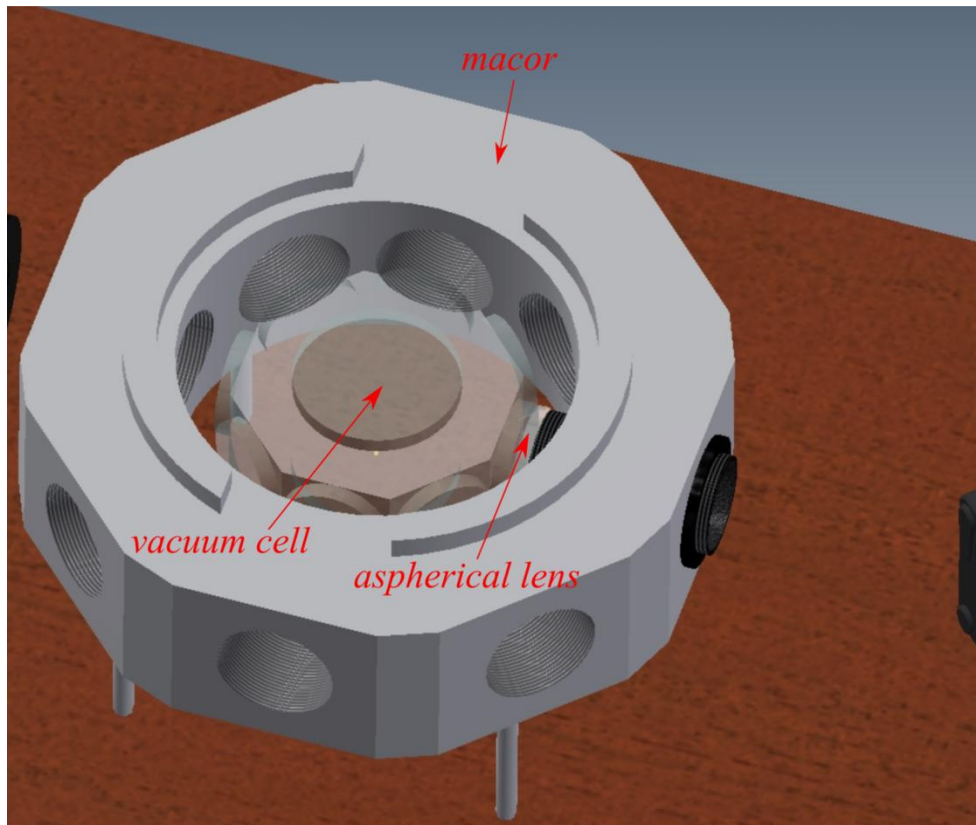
Optomechanical design of the aspherical lens mounting. This drawing shows the way that aspherical lens be mounted next to vacuum cell.
